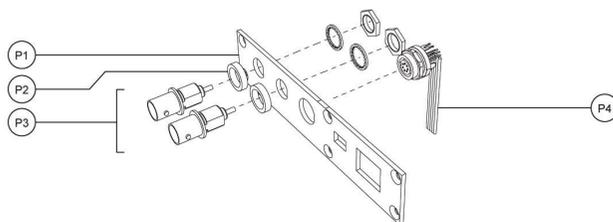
Assemble the parts of the new CONNECTOR BRACKET
